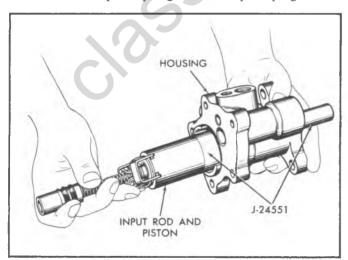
Installing Input Rod and Piston Assembly into Booster (Typical)
